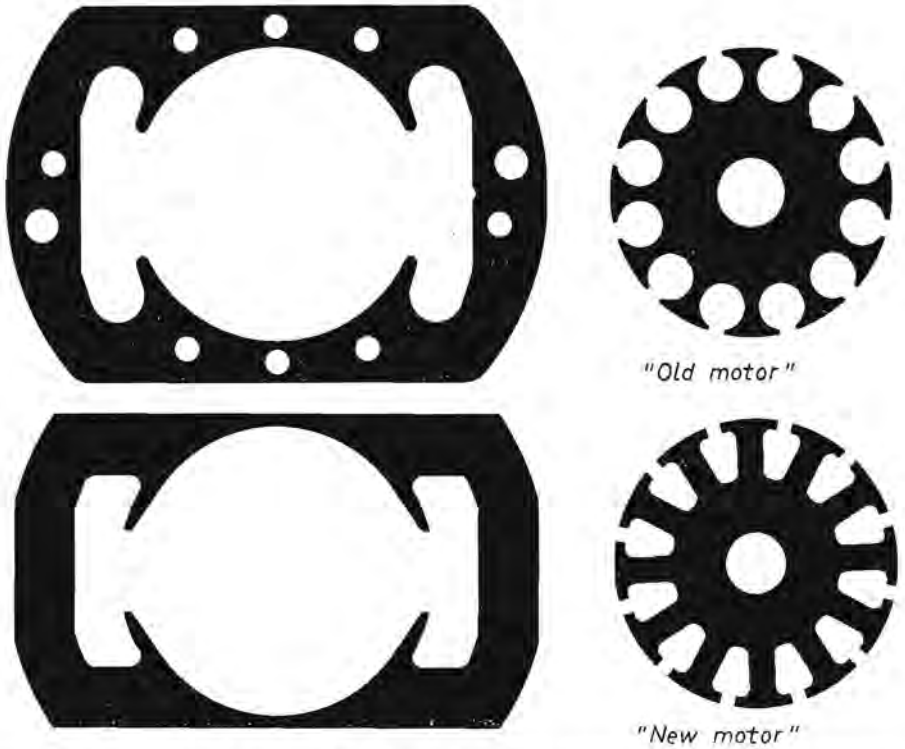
Shape and dimensions of the rotor and stator laminations of an existing vacuum-cleaner motor (the old motor) and one calculated on the principles developed in this thesis (the new motor).
